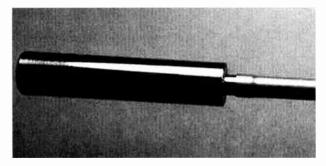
Use swaging tool to enlarge capsule end of wand.
